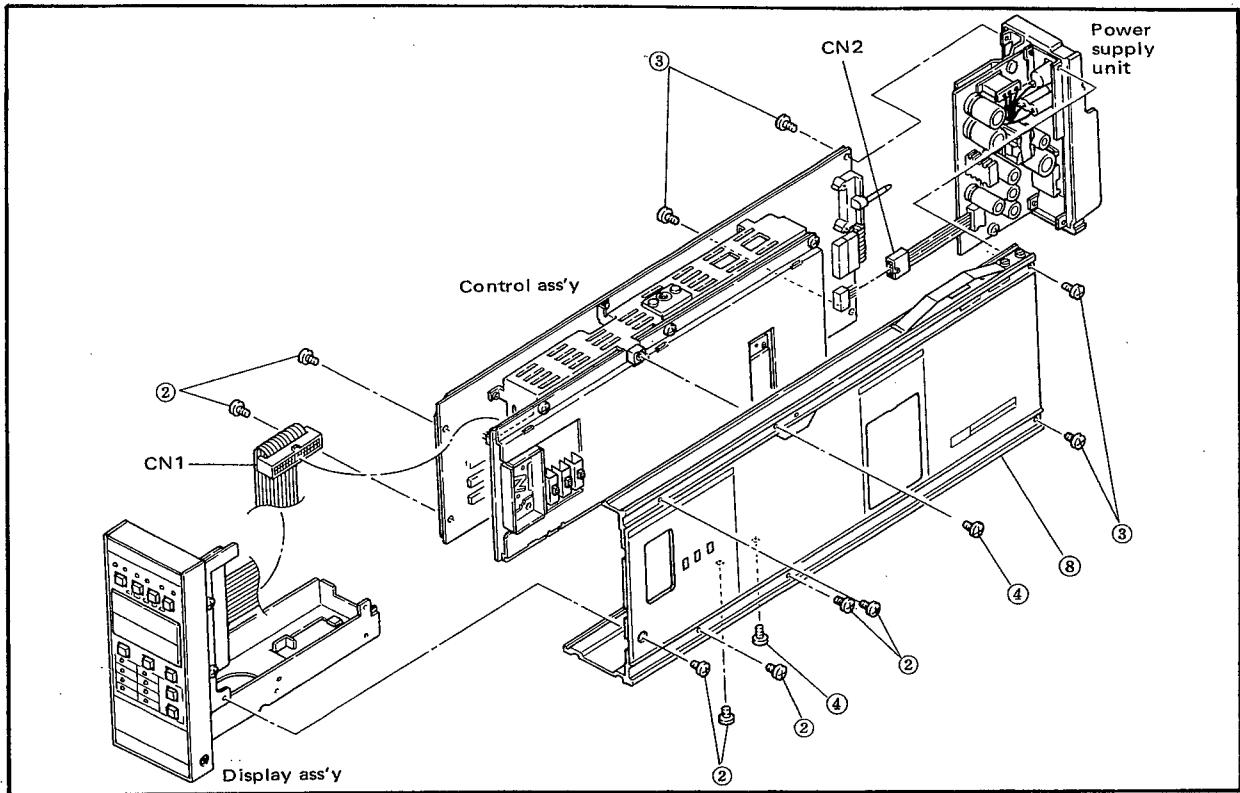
Removing Display Assembly and Power Supply Unit.
